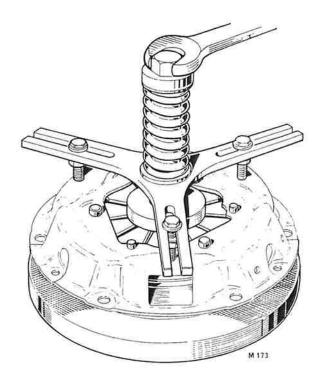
Tighten down the large nut so that the diaphragm spring is compressed flat.
